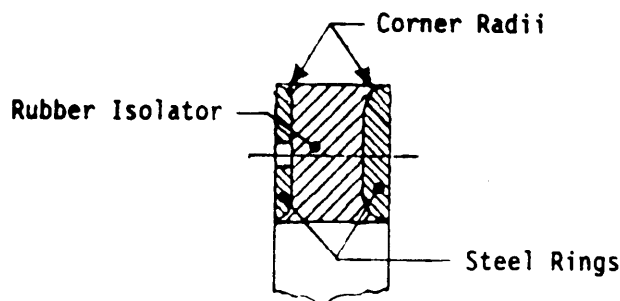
M1113 Prototype Quiet Sprocket Wheel Isolator Design
